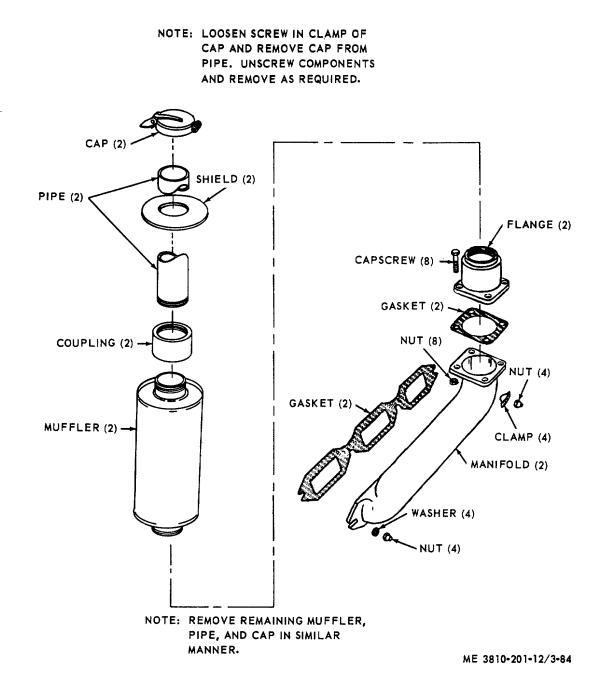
Exhaust pipe, muffler, and cap, removal and installation (engine model 687C-18-ES).
